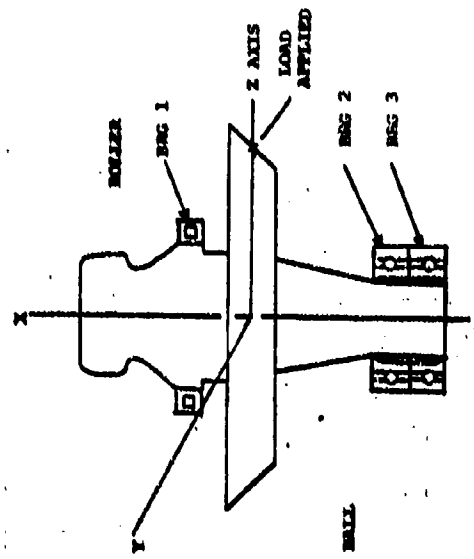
CH-47C Forward Transmission Sun Gear Support Bearings.
